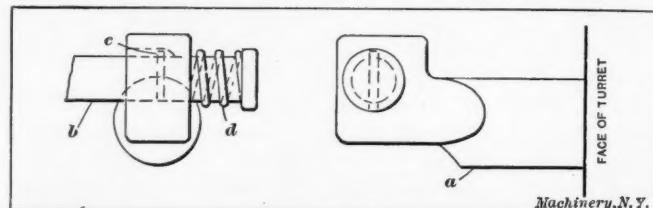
Tool and Holder used in Shaving the Piece shown at C in Fig. 1.
